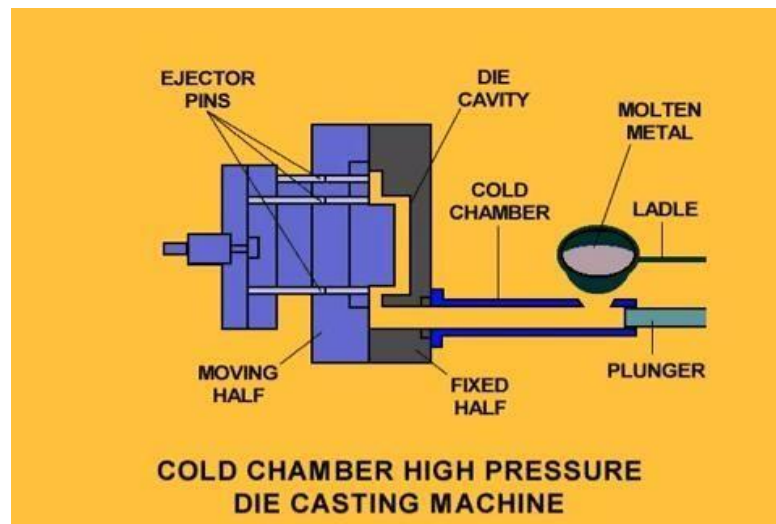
Cold Chamber Die Casting Machine (Albuquerque Marques, et al,2017)
